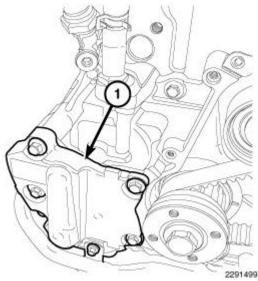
Oil Pressure Relief Front Cover Bolts Courtesy of CHRYSLER LLC
